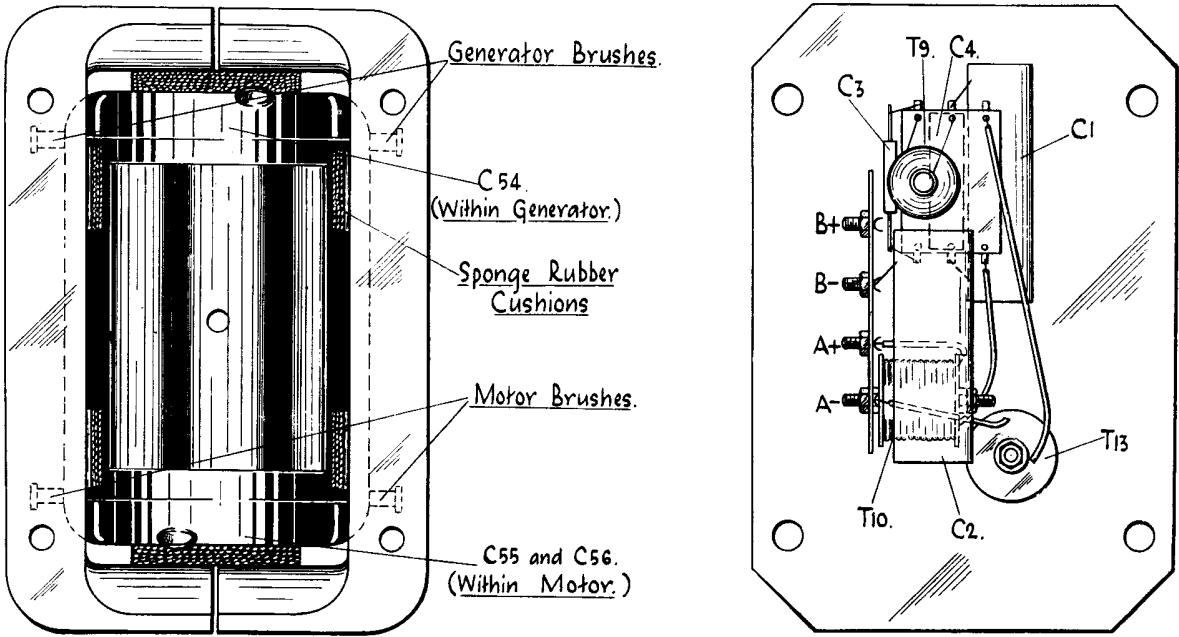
Motor-Generator Unit (showing base plate assembly)
